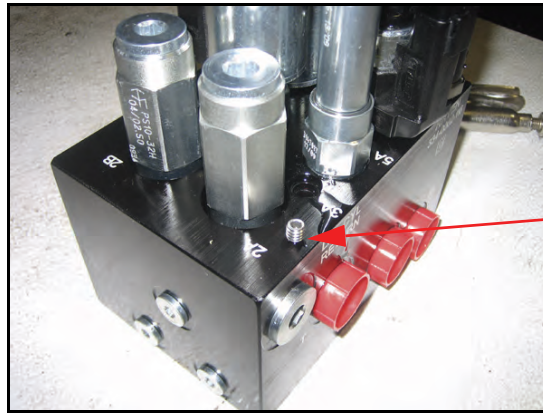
Port Plugs Removed from the AutoBoom Valve
